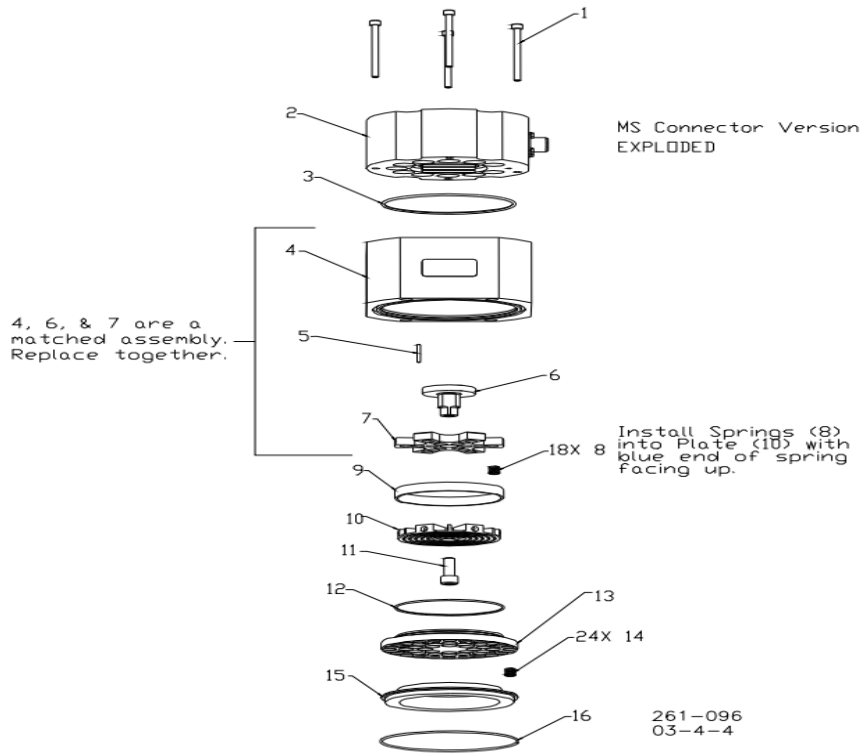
SOGAV 250 Exploded Assembly / MS Connector Version
